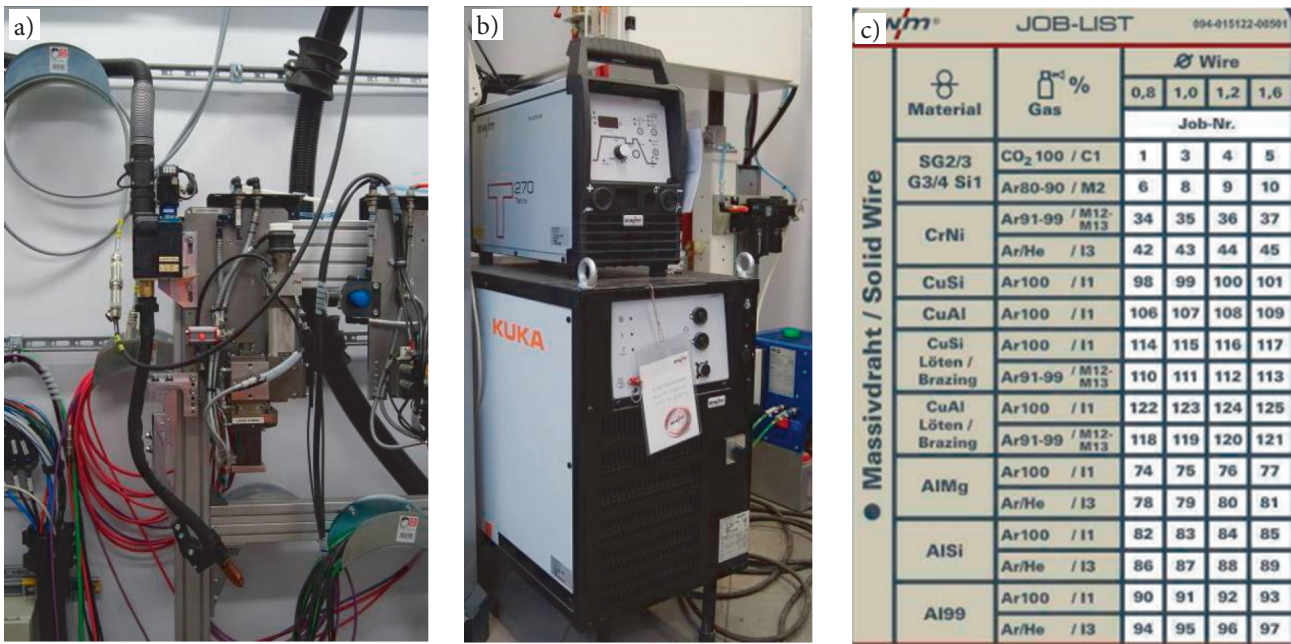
Laser head for laser and hybrid welding (laser + MIG/MAG) (a); MIG/MAG welding power source (EWM) (b); exemplary list of welding machine programmes in the synergic mode (c)
